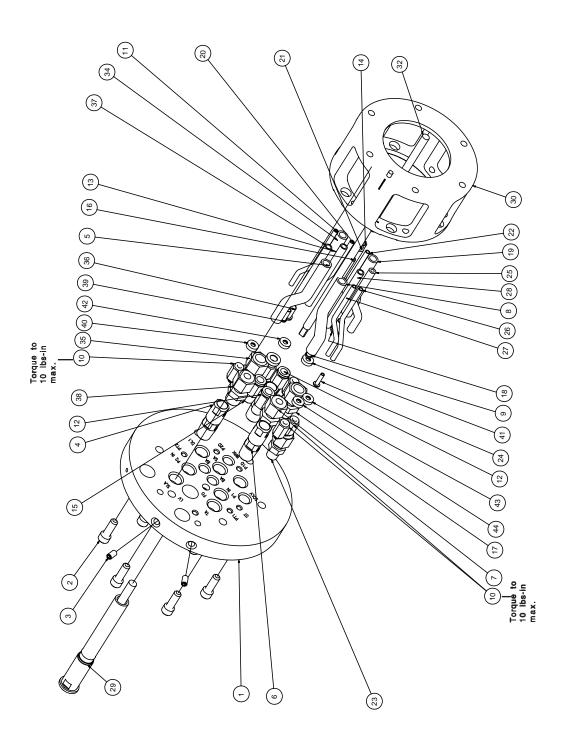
A10892-XXXXXXX Tubing Bundle Assembly (Metric)
